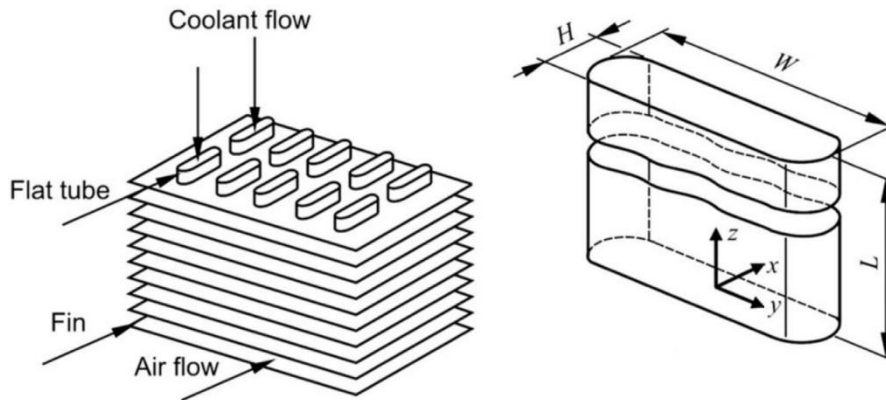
Schematic view of radiator flat tube channels (Elsebay et al., 2016)
